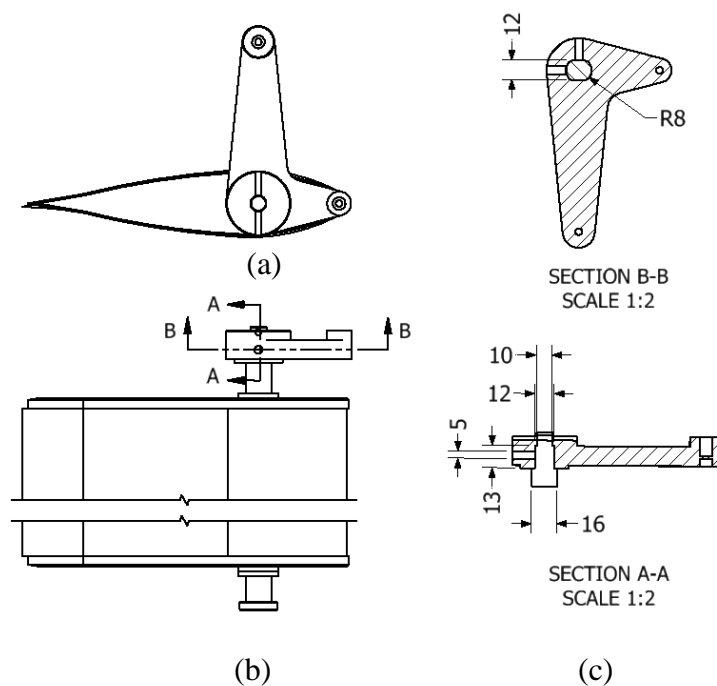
Old cam arm to blade shaft connection schematic with (a) plan view, (b) broken partial side elevation and (c) sectional planes A-A and B-B.
